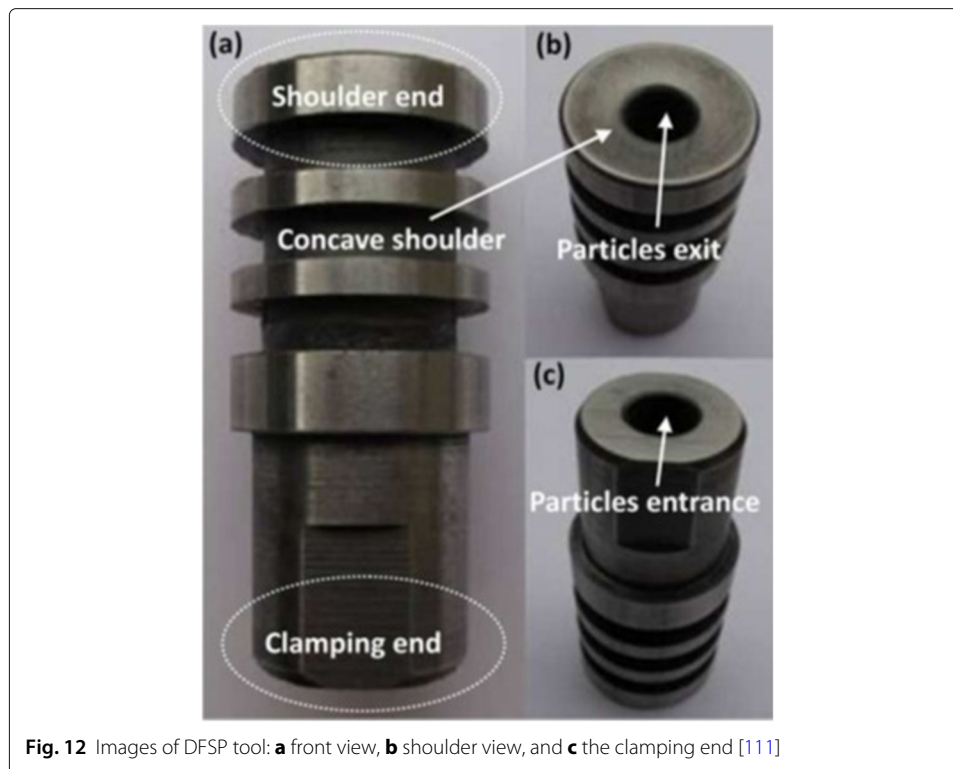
Images of DFSP tool: a front view, b shoulder view, and c the clamping end [111]
